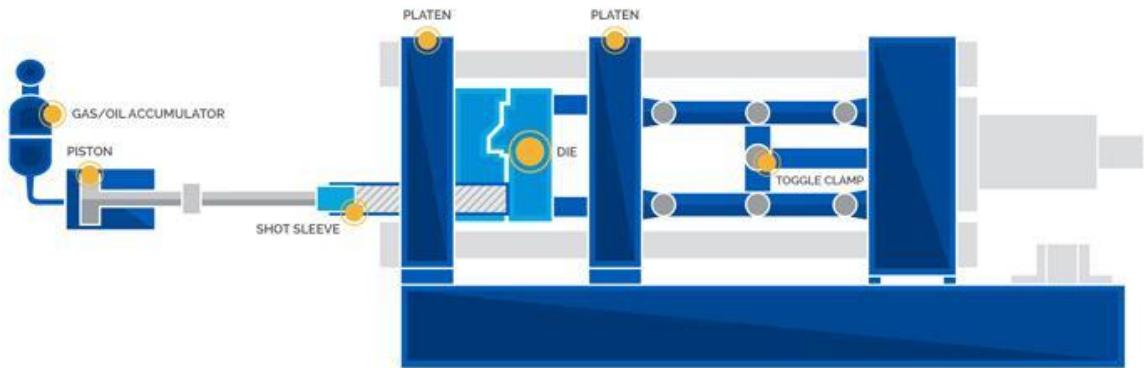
Main components of a cold-chamber die casting machine (Dynasty, 2019)
